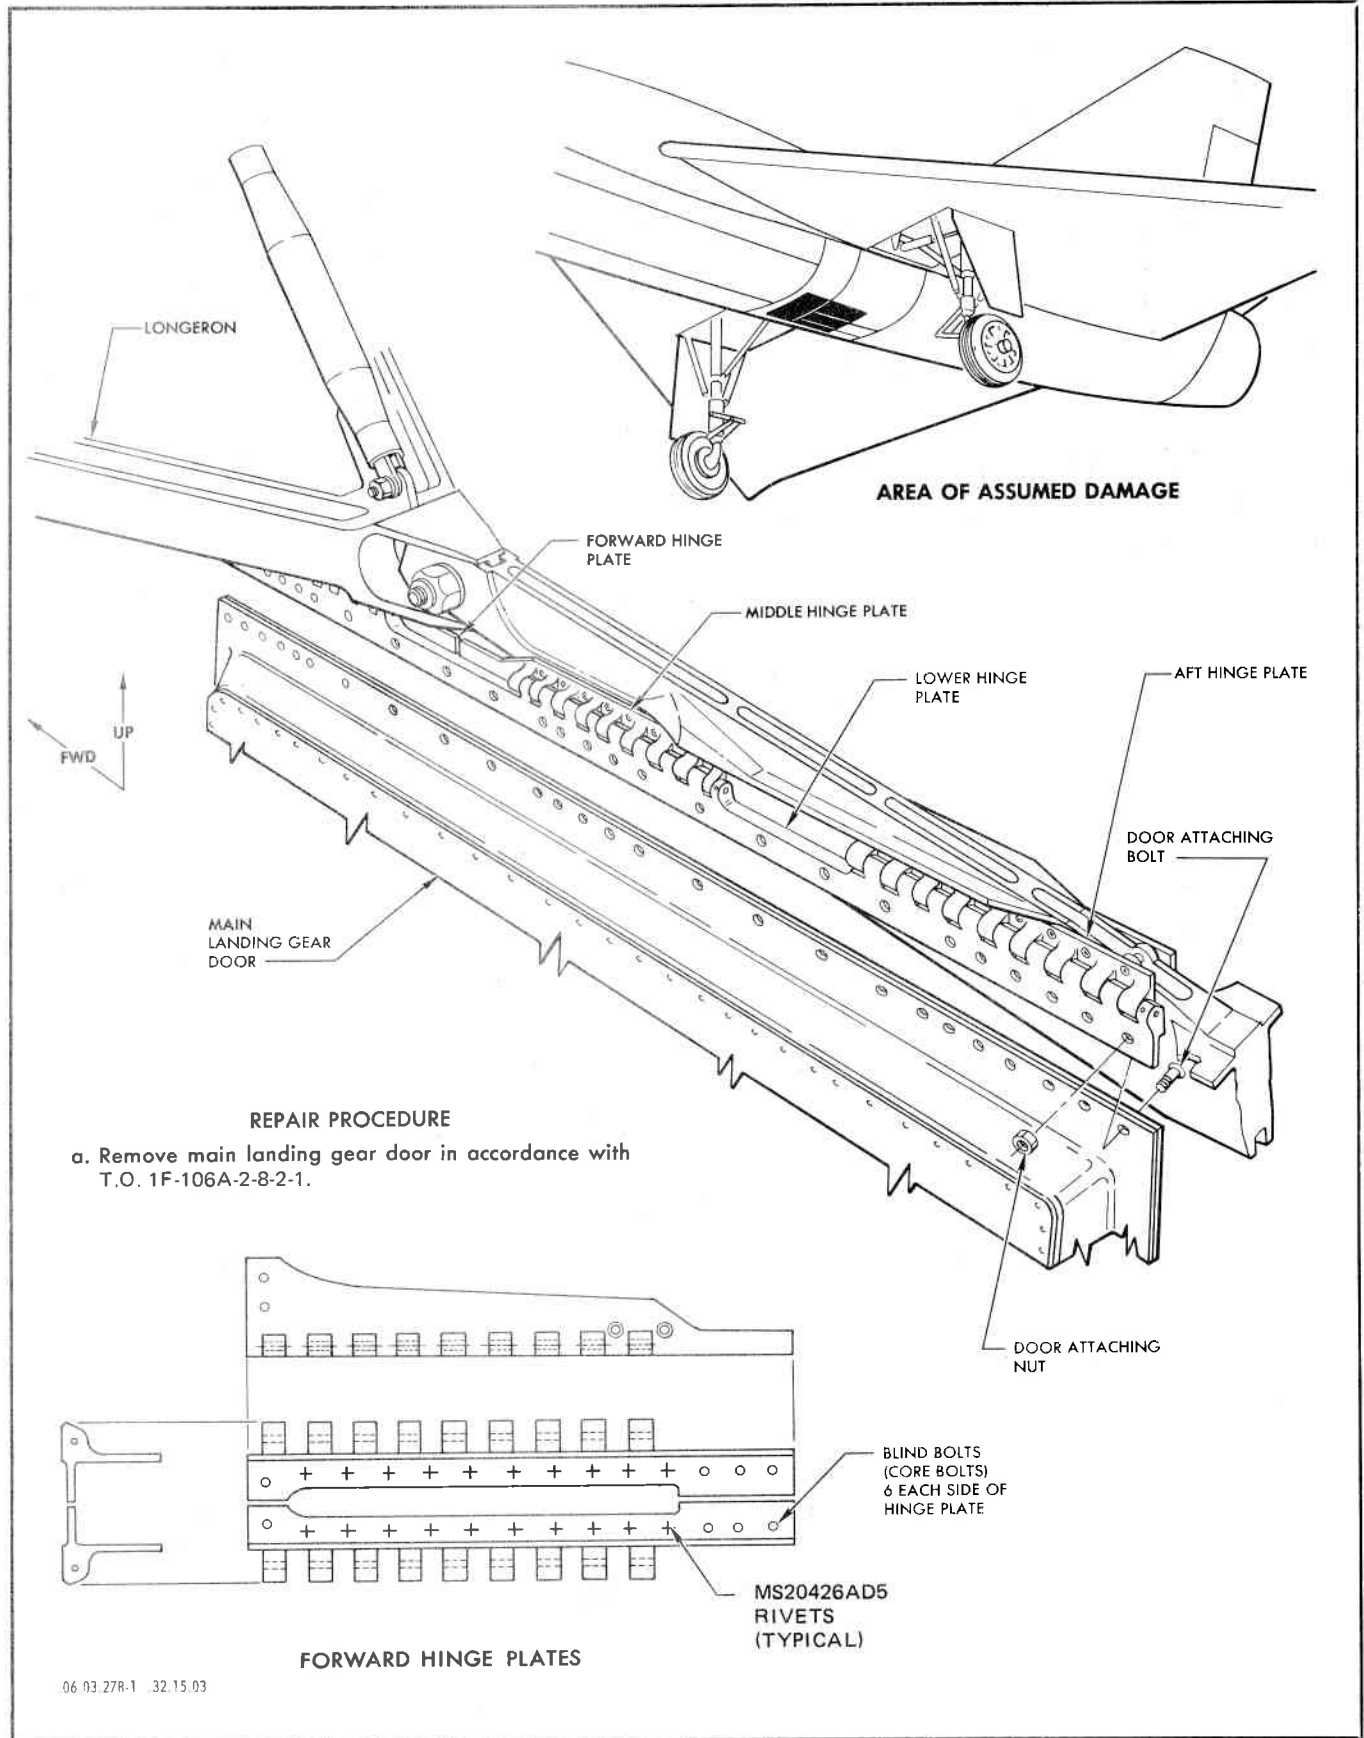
Main Landing Gear Door Attachment Repair (Sheet 1 of 2)
